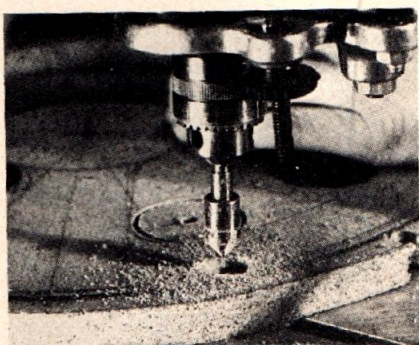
COUNTERSINKING holes in the bulk-head prevents screwheads from protruding.
